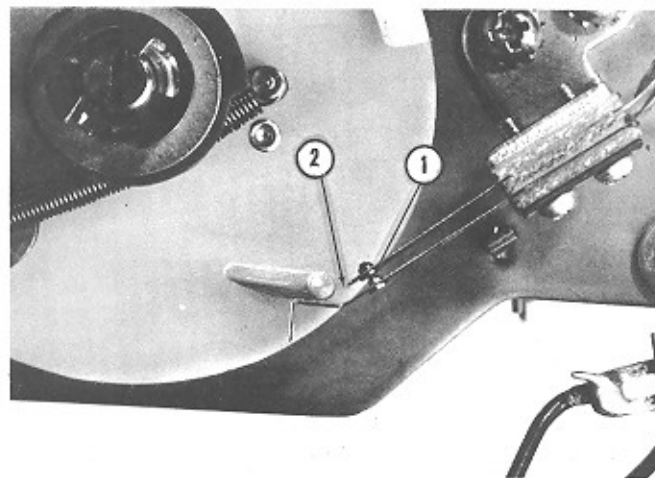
SWITCH CLEARANCE ADJUSTMENT
